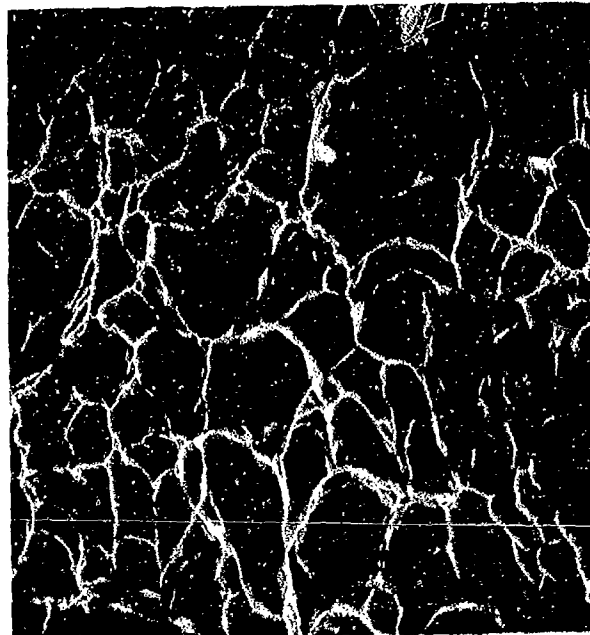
Tensile overload region of fracture surface of AX-110 weldment containing porosity, 1380x.
